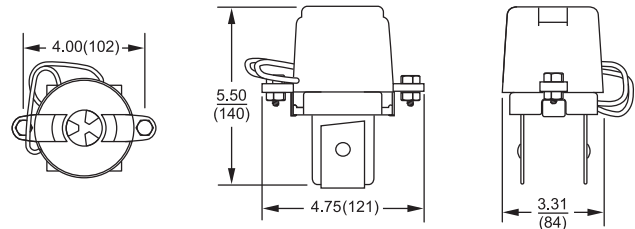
Figure B — Indicator with Attached Sensor. Tie-Wrap Mounting.
